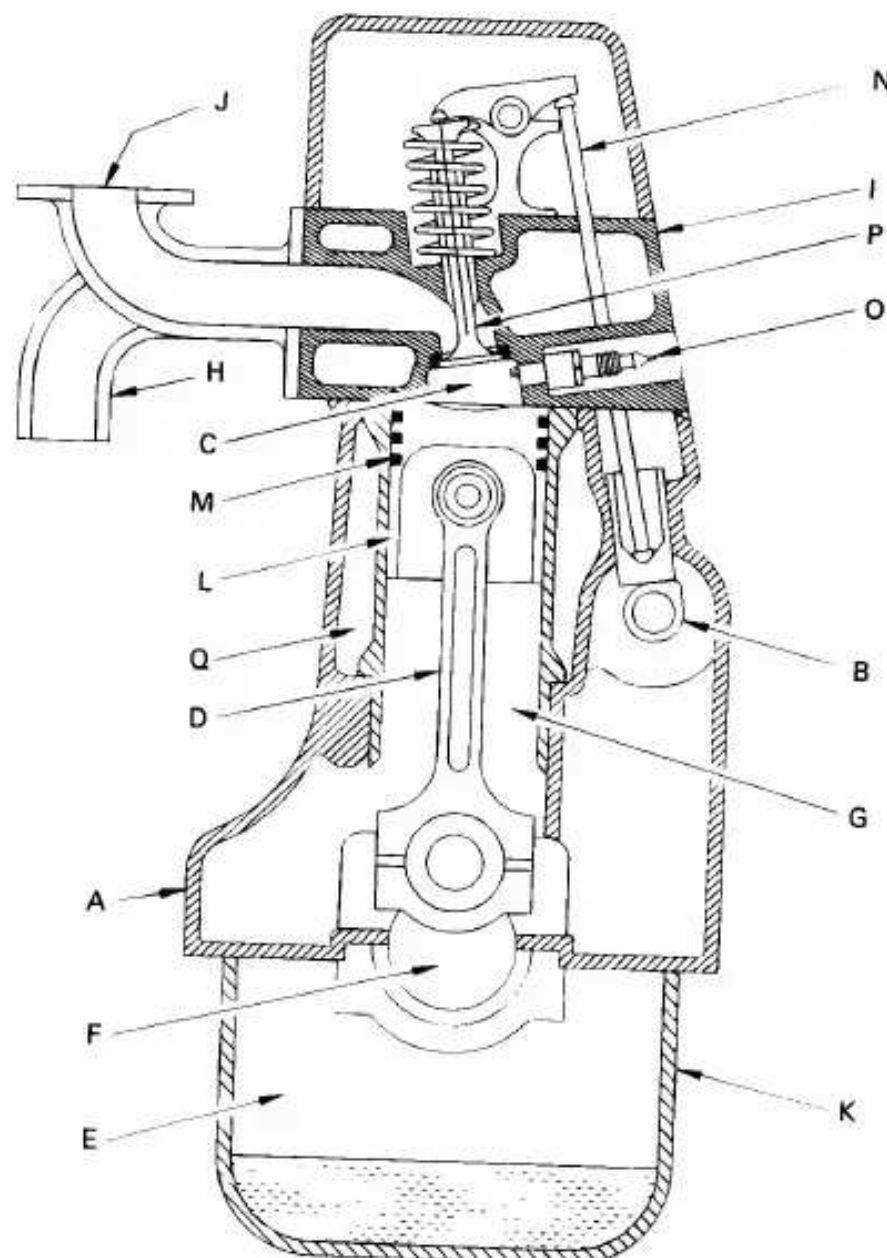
Cross-section of four-stroke cycle SI engine showing engine components; (A) block, (B) camshaft, (C) combustion chamber, (D) connecting rod, (E) crankcase, (F) crankshaft, (G) cylinder, (H) exhaust manifold, (I) head, (J) intake manifold, (K) oil pan, (L) piston, (M) piston rings, (N) push rod, (O) spark plug, (P) valve, (Q) water jacket.
